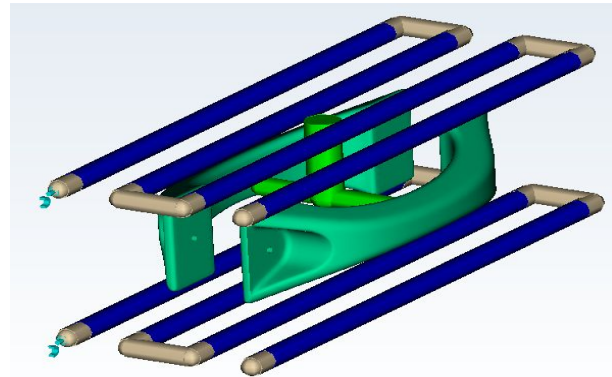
design consisting of sprue, gate, cooling channels and runner
